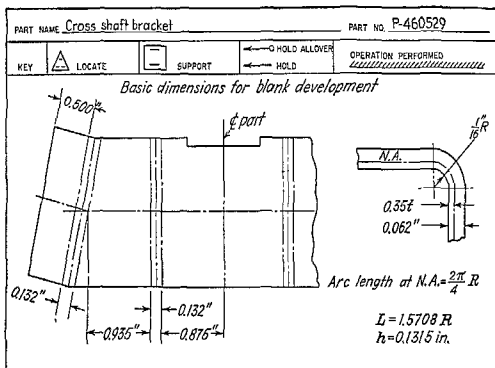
A. Process picture sheet; basic dimensions for blank development.
